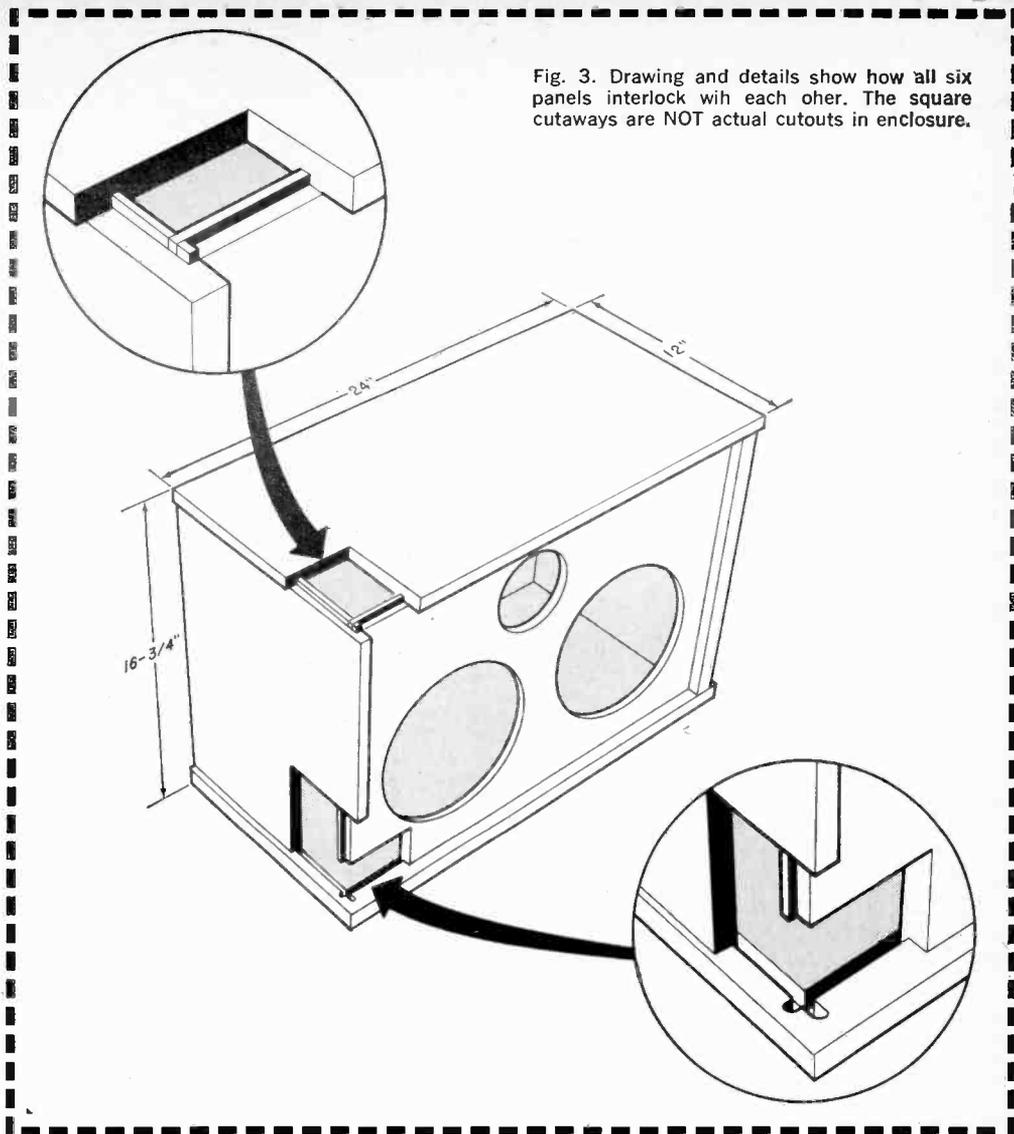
Drawing and details show how all six panels interlock with each other. The square cutaways are NOT actual cutouts in enclosure.
